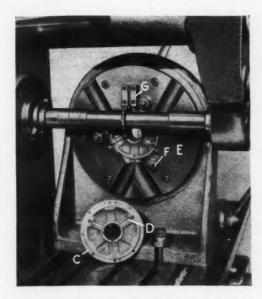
Guide slots for the main drive ball spindles are plunge-milled at this set-up on an Archdale horizontal milling machine
